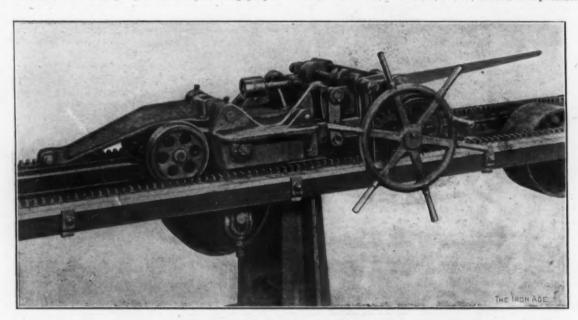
Detail of the Carriage on the Thomas Improved Spacing Machine.
